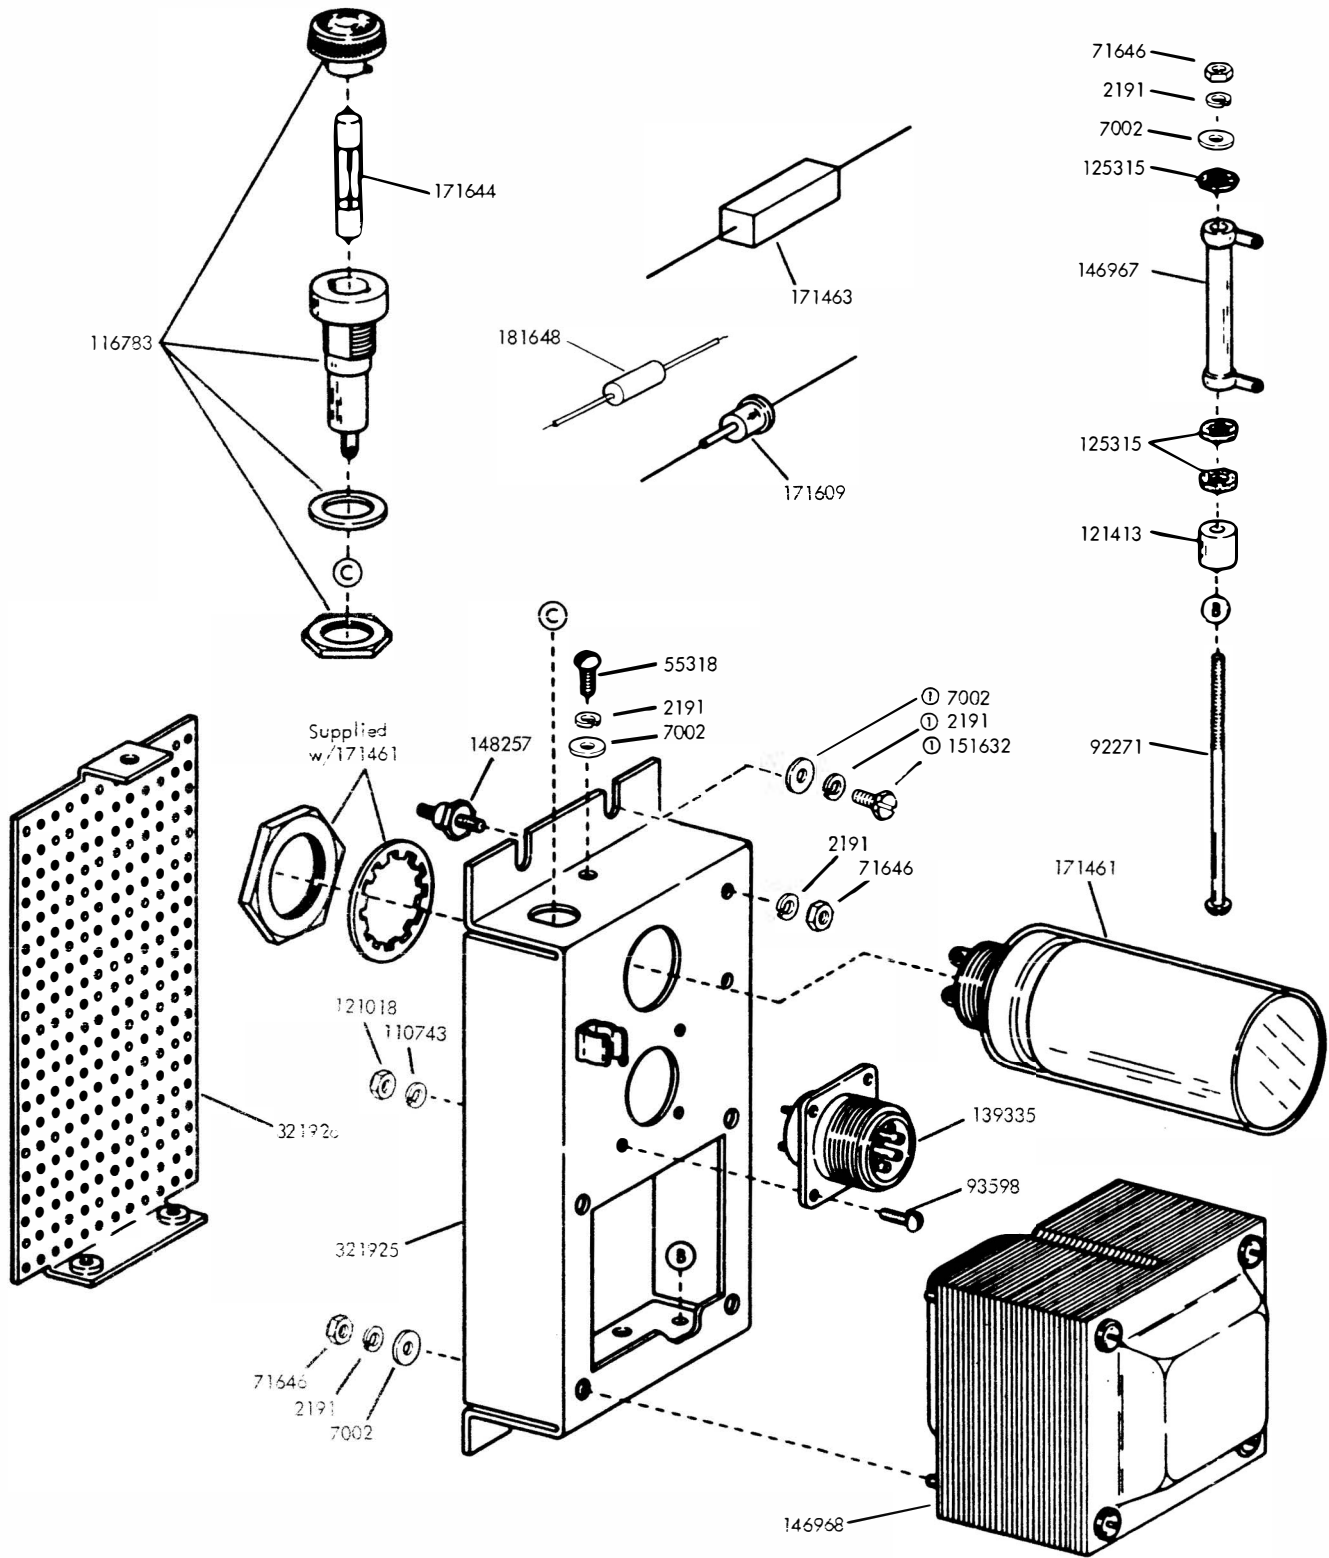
146901 RECTIFIER ASSEMBLY
